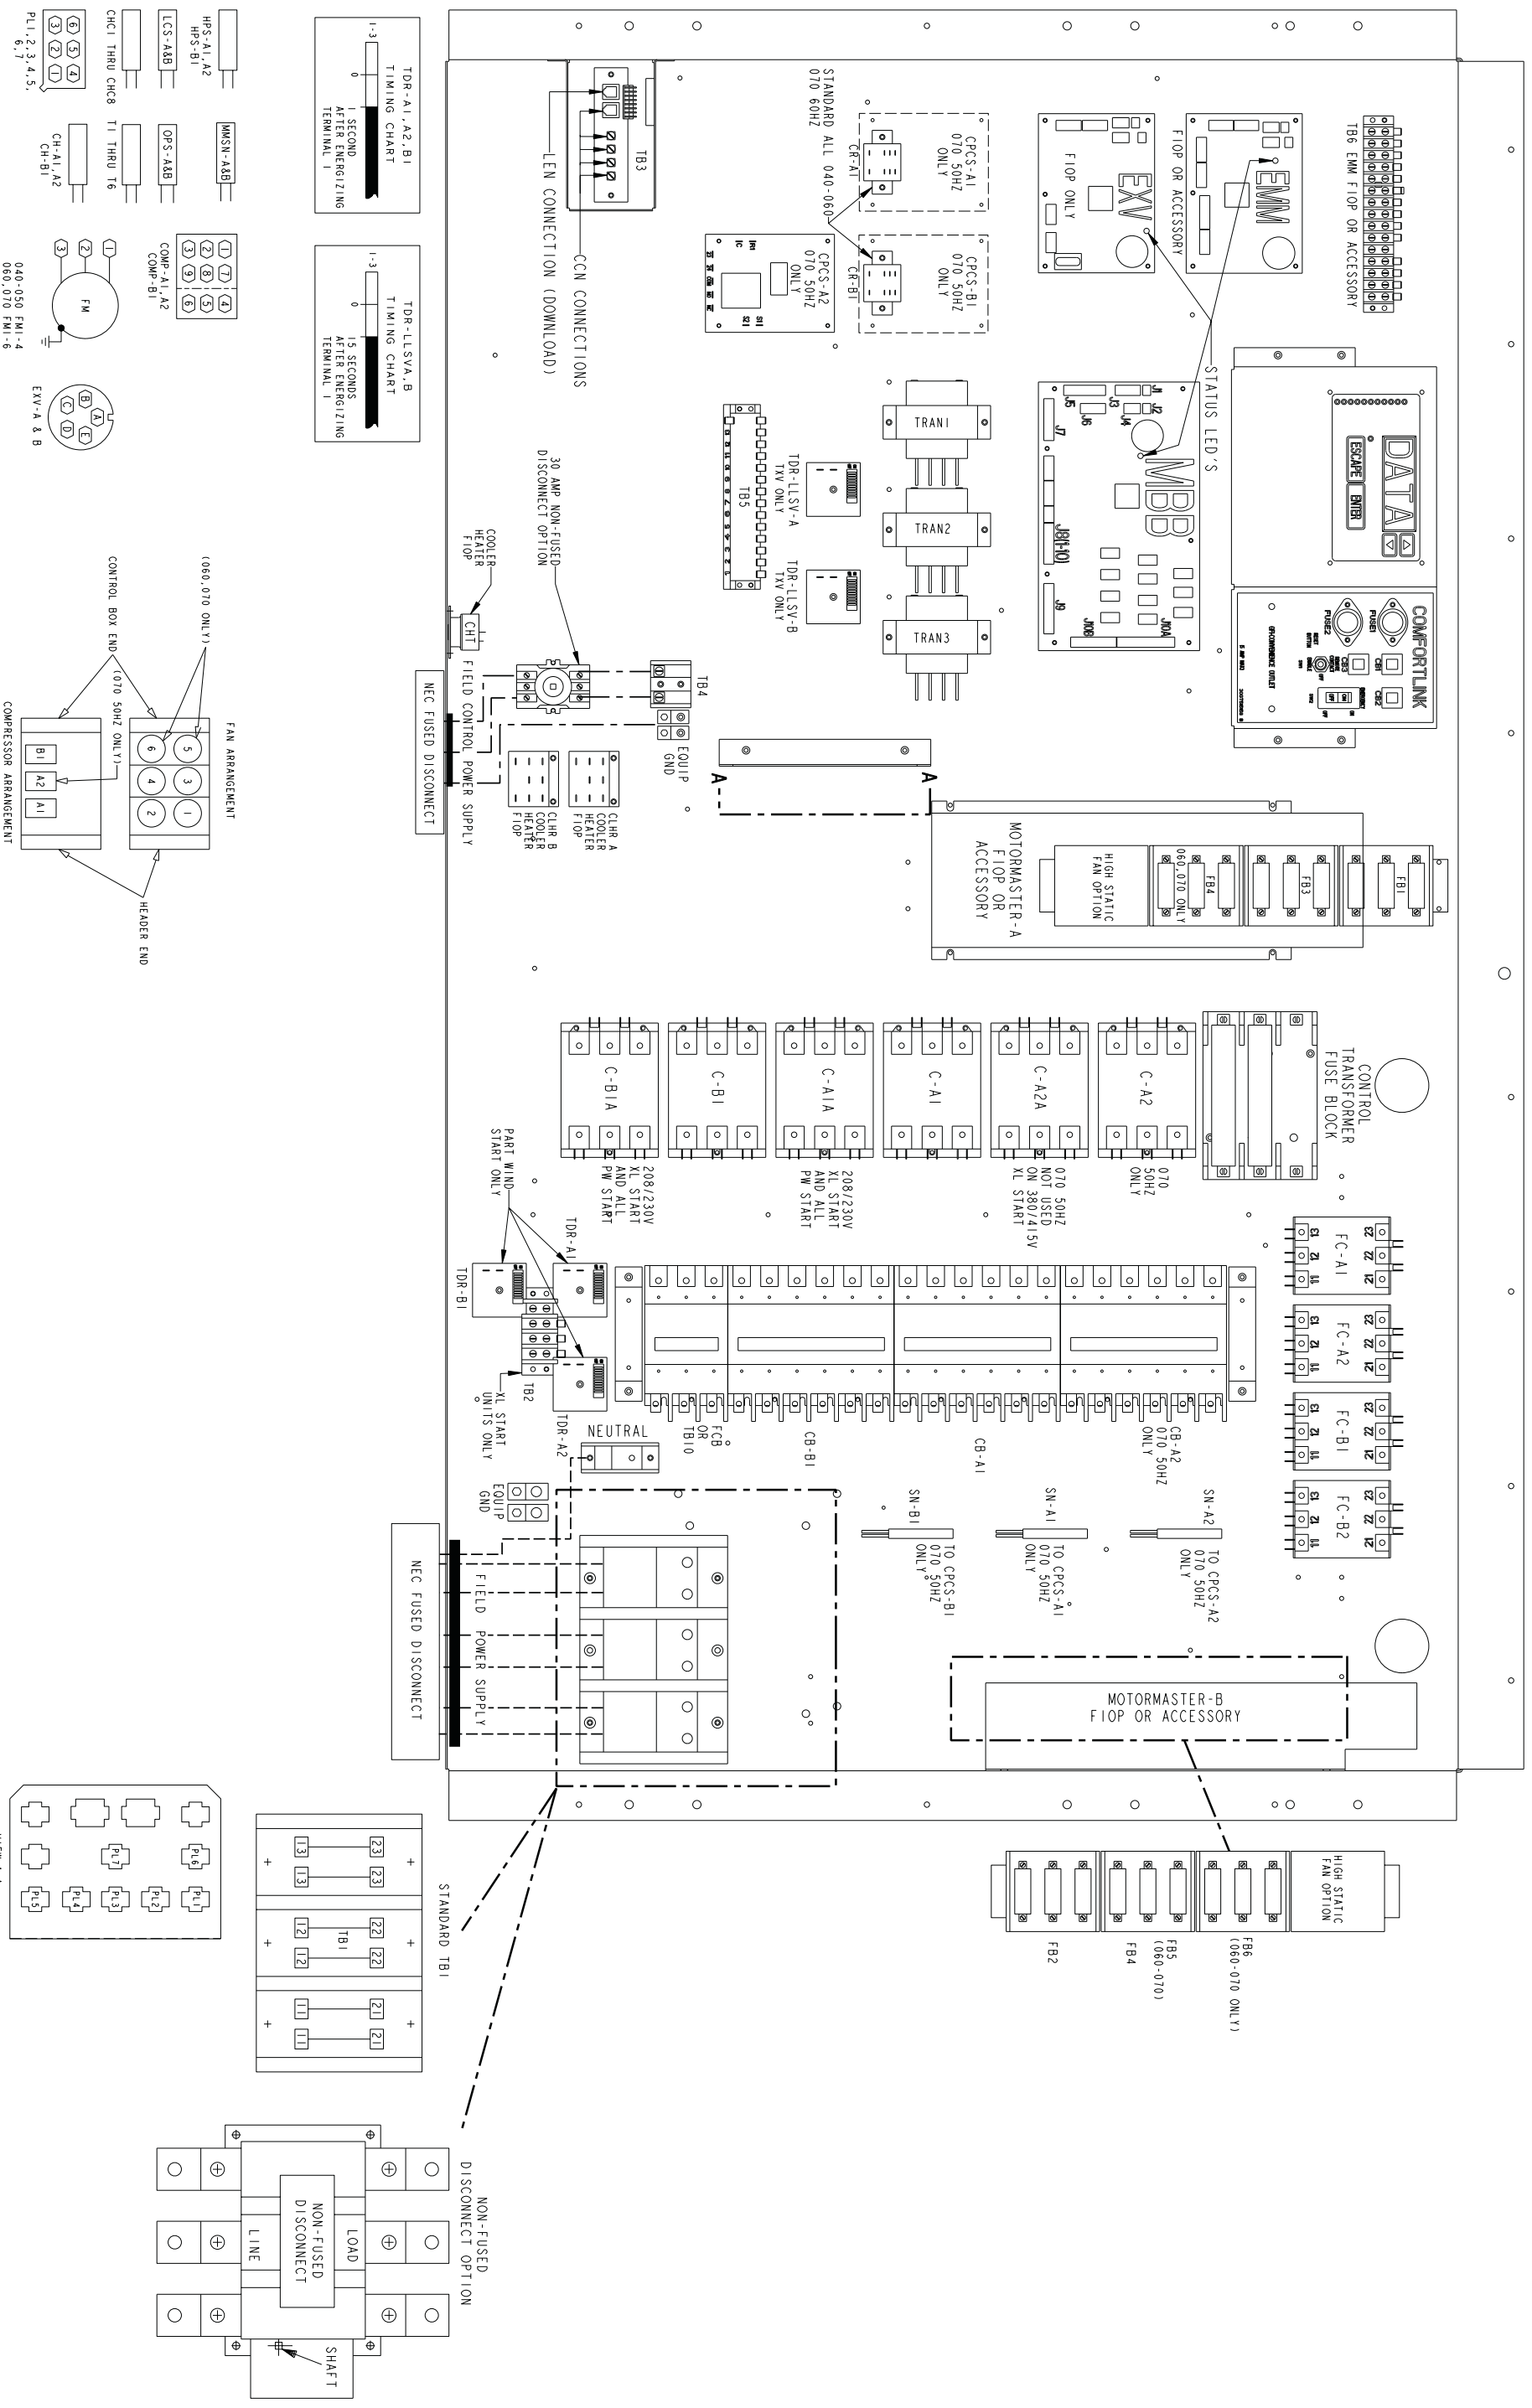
Component Arrangement; 30GTN, GTR, GUN, GUR040-070
